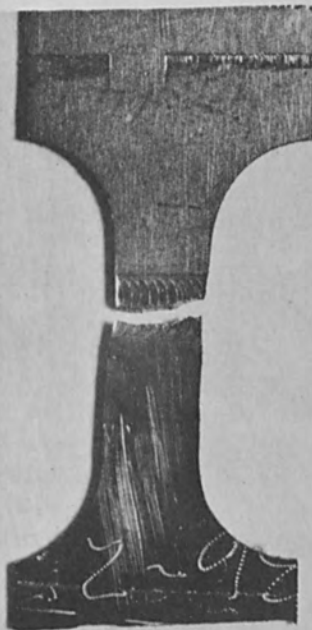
Lap seam weld of 0.005-inch-thick tungsten sheet on top of 0.005-inch-thick aluminum sheet.
